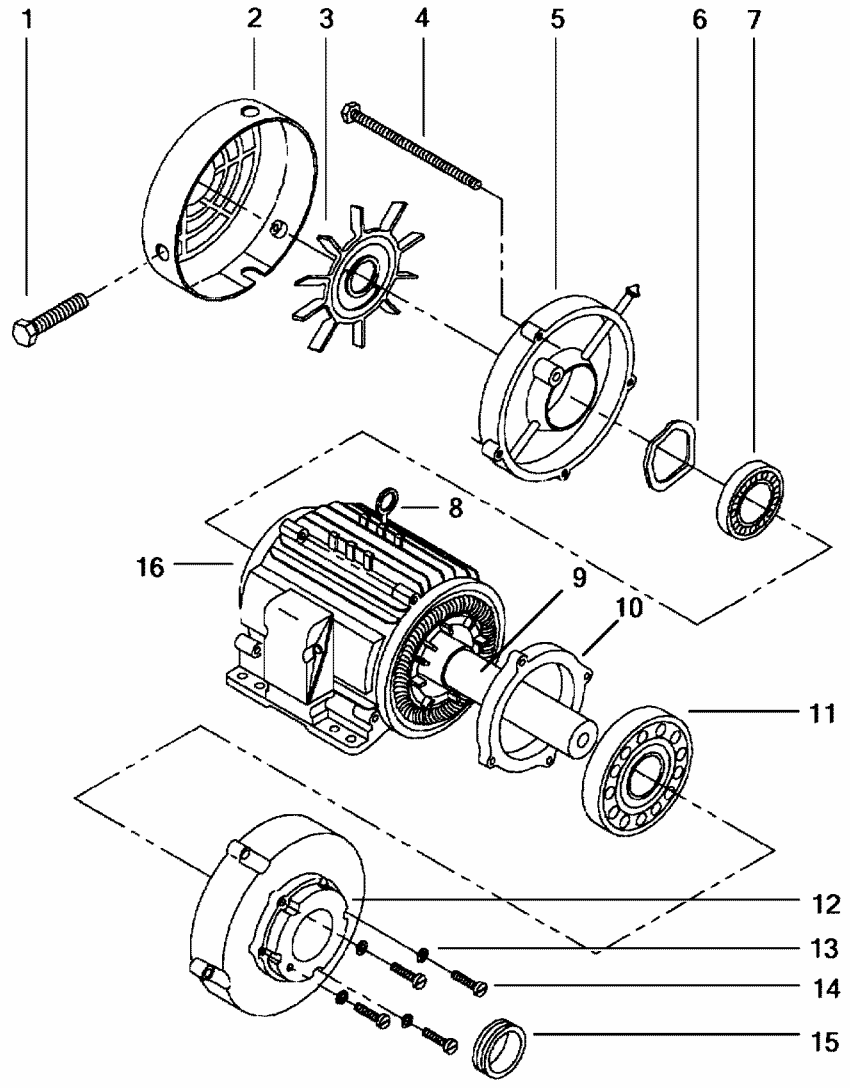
A. Auxiliary Seawater Pump A/C Motor.
